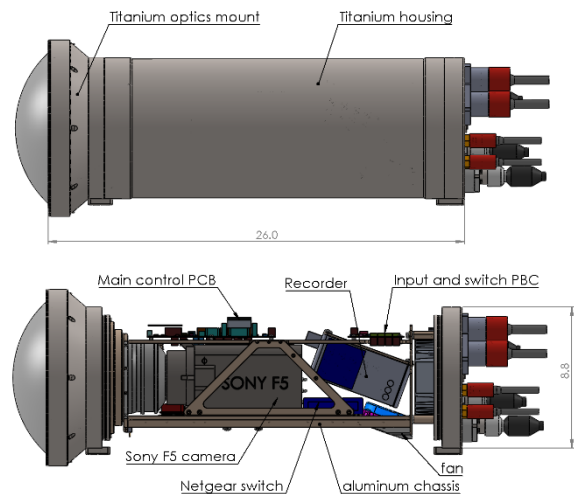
A custom housing designed for the camera, recorder and optical elements.
